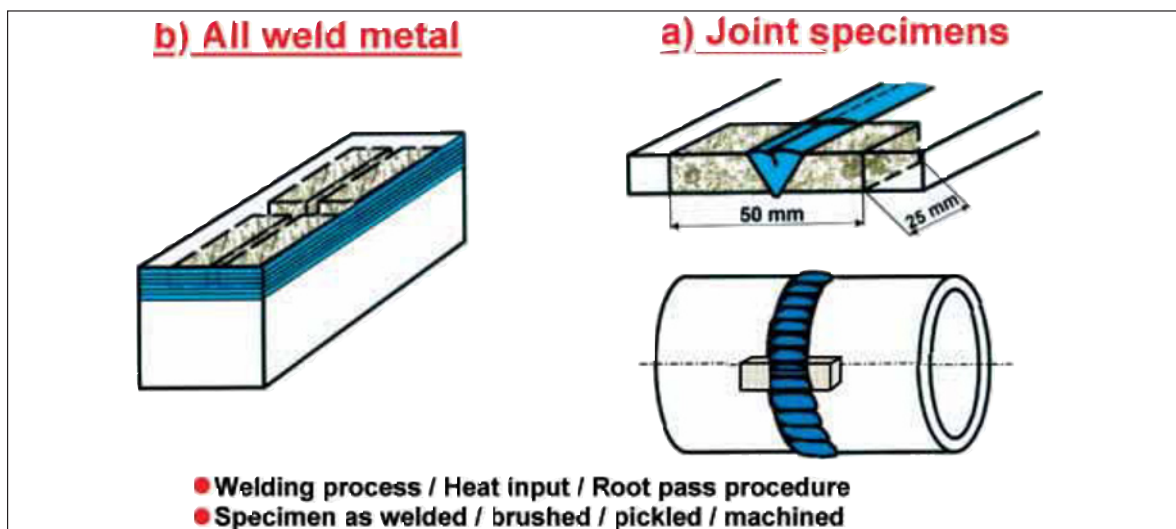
Specimens for corrosion tests of all-weld metal and joints
